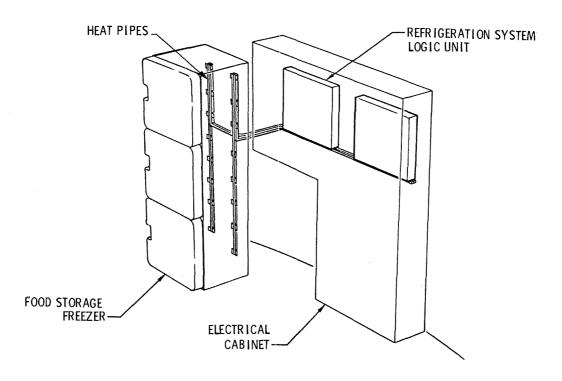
Heat Pipe Installation -- Food Freezer
